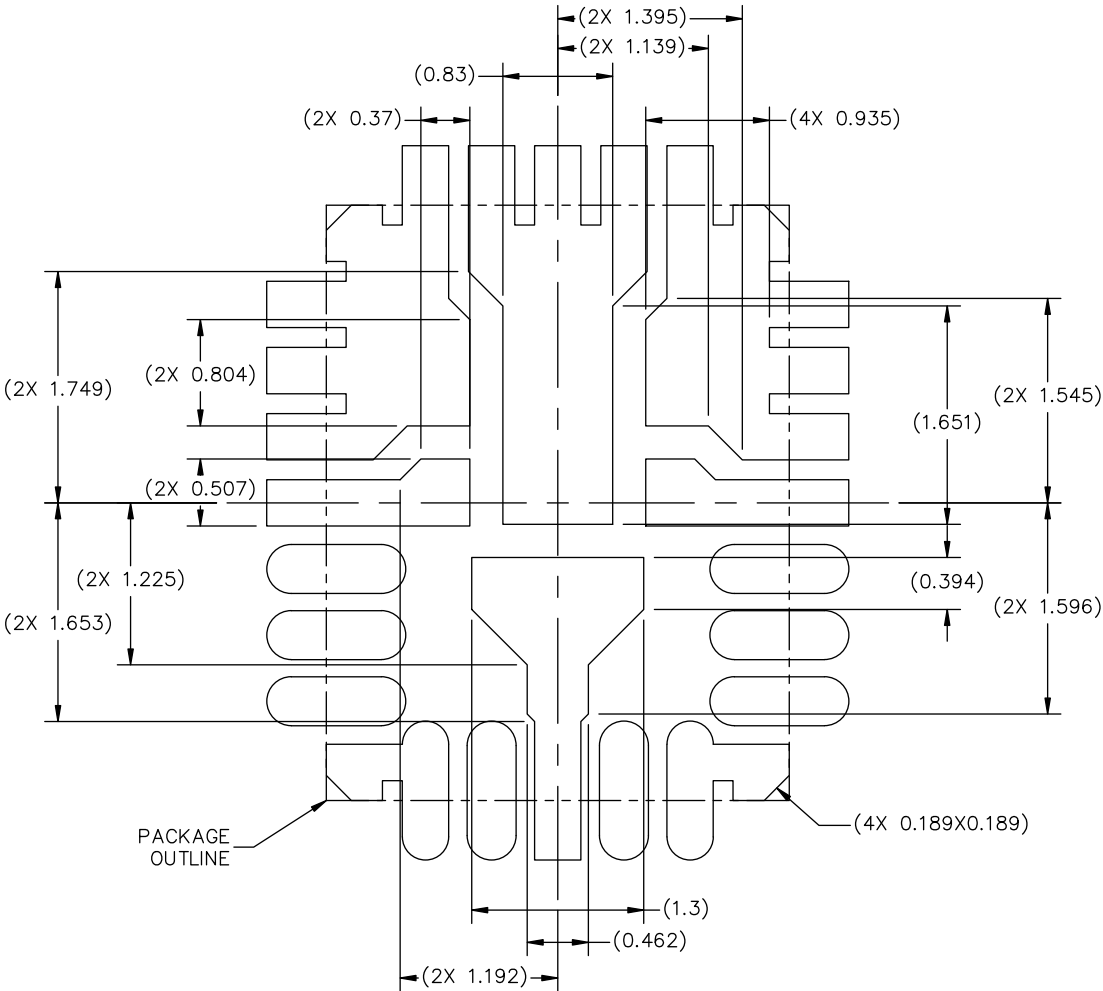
Reflow soldering footprint part1 for FC-PQFN-COL24 (SOT2283-1)
